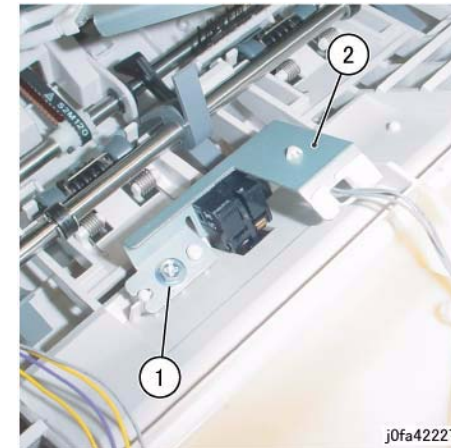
Removing the Compile Exit Sensor Assembly (j0fa42227)
